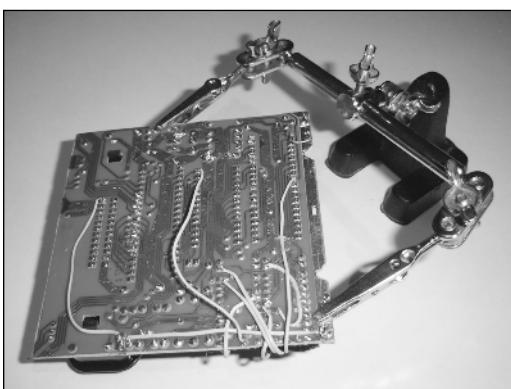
Helping Hands holding a hacked-up Atari motherboard.
